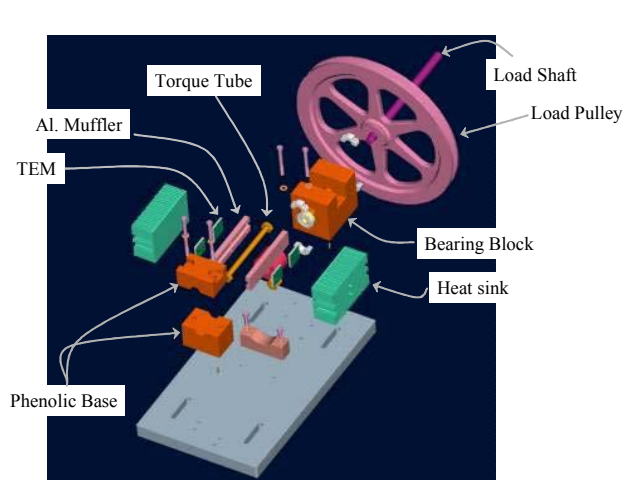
Schematic illustration of the shape memory torque tube test rig.
